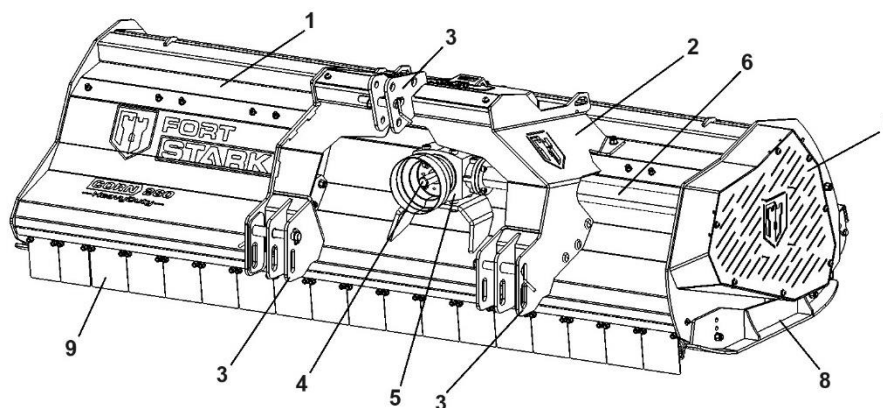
Flail mower – general construction: 1 – body, 2 – frame with three-point linkage, 3 – three-point linkage system, 4 – power take-off shaft (PTO), 5 – angular gearbox, 6 – intermediate shaft, 7 – belt drive, 8 – skids, 9 – split front guard
